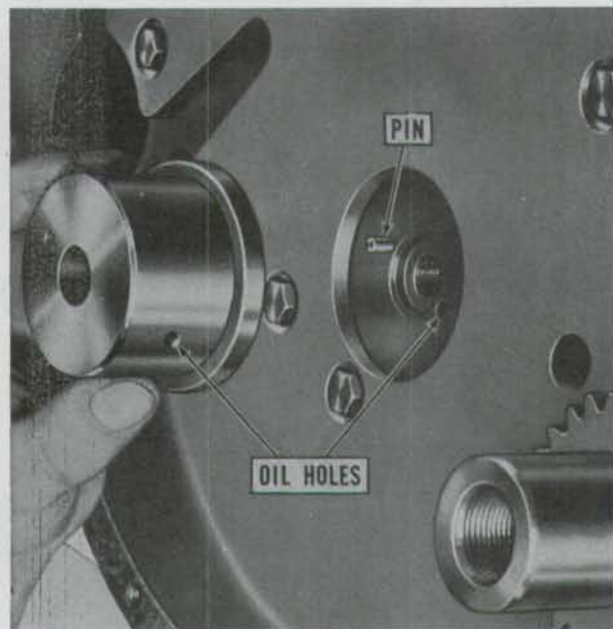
Timing gear idler stud removed, showing locating pin and oil feed holes in block and stud.
